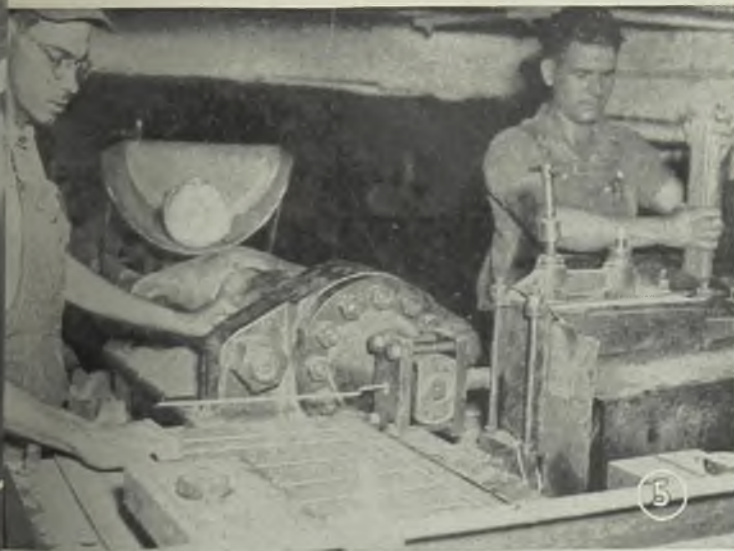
Welding rods drop from extrusion die to conveyor belt on way to the oven. Rod coating material is forced through dies by hydraulic pressure feeding into nozzles of fixed diameter which control coating deposits
